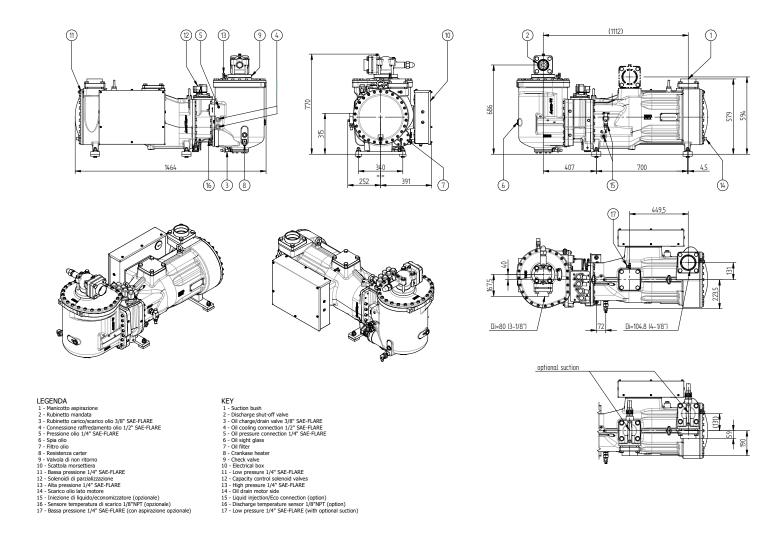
dimensional drawing of the models: RS5-L125/L140/H160/H180 (drawing code: MSI305-AC);
